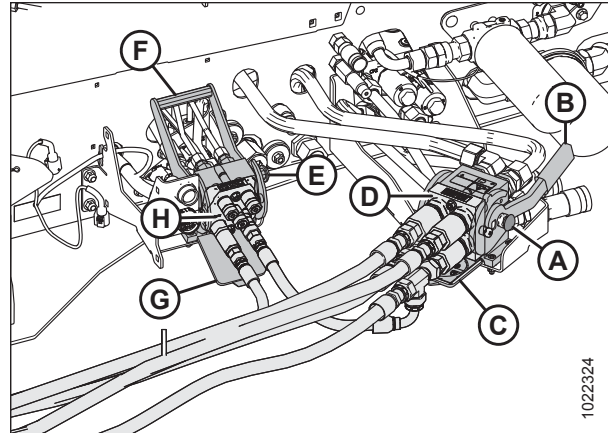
Knife/Reel/Auger Drive Multicoupler
